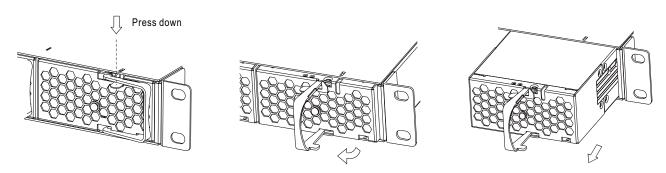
Illustration of how to remove the RCP/RCB-1600 from a rack
